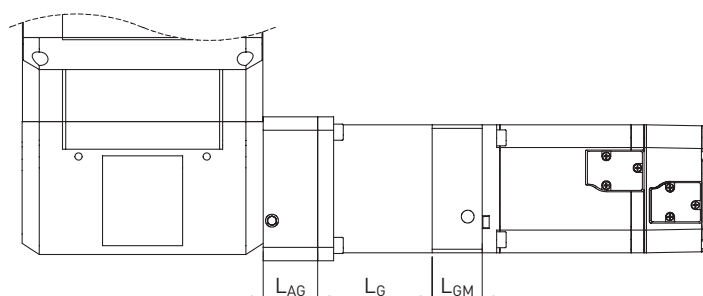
Motor connection of cantilever axis HC without gearbox
